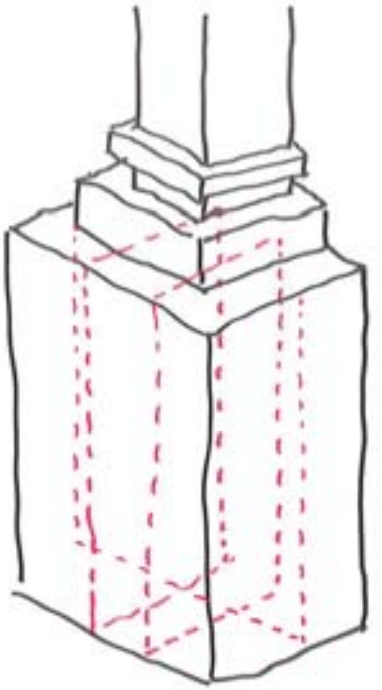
Example sketch of additional mesh stiffening fins added to a large flat section.
